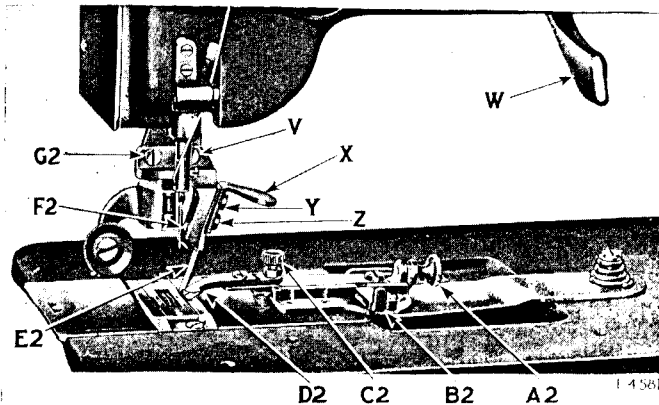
ADJUSTMENTS OF TRIMMER AND EDGE GUIDE ON MACHINE 110 w 120
